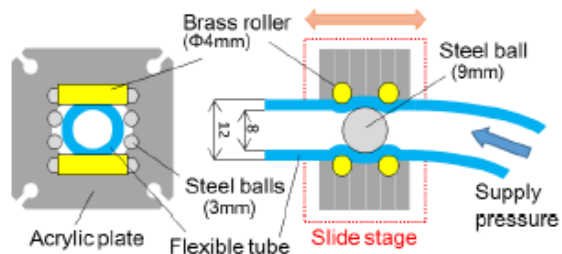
Working principle of the rod-less type flexible pneumatic cylinder. It contains brass rollers, a large steel ball (9mm), smaller steel balls (3mm), and a tube [3].
